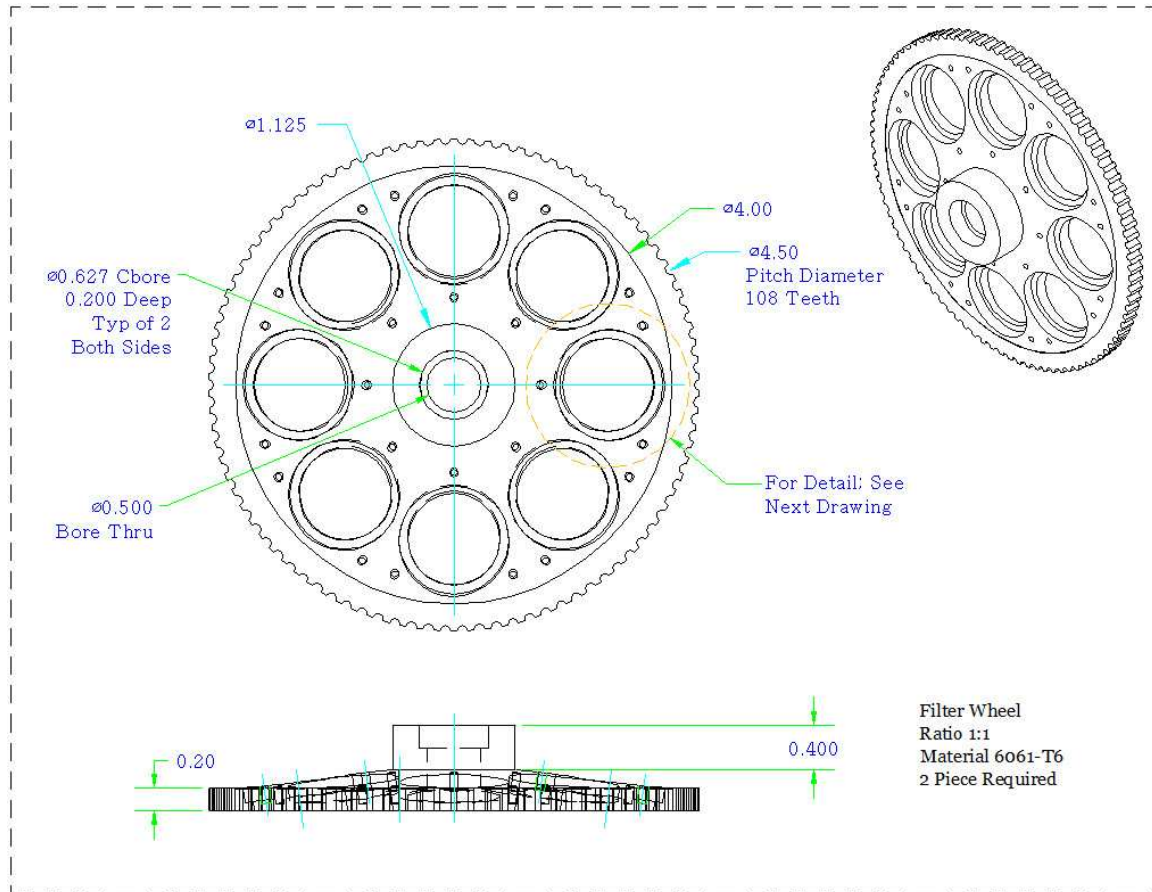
An example of CAD drawing: Filterwheel. Filter-holding surface is tilted 7° from the wheel axis.
